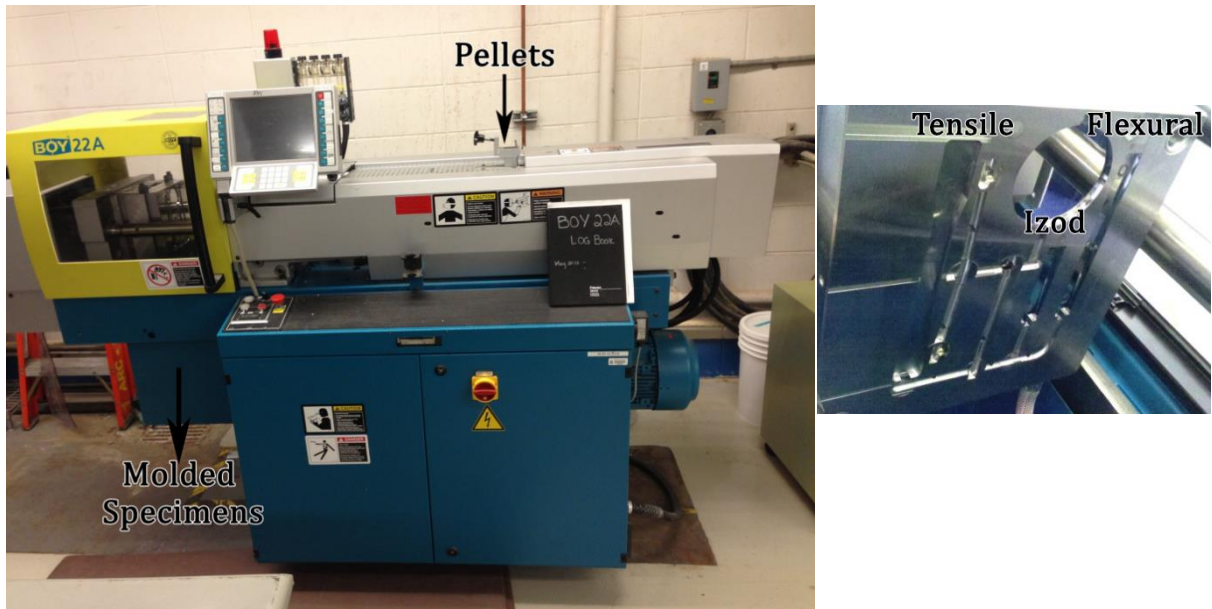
Left: BOY 22A Injection molder Right: Mold cavity with all three specimen types manufactured in one injection molded shot.
